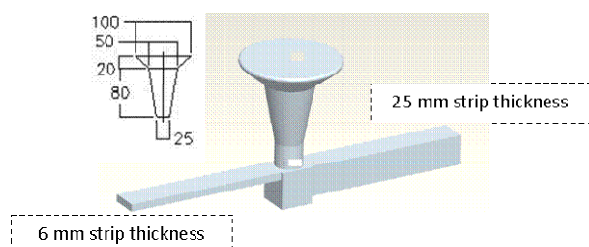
DESIGN USED FOR CASTING SPECIMENS (UNIT IN mm)
